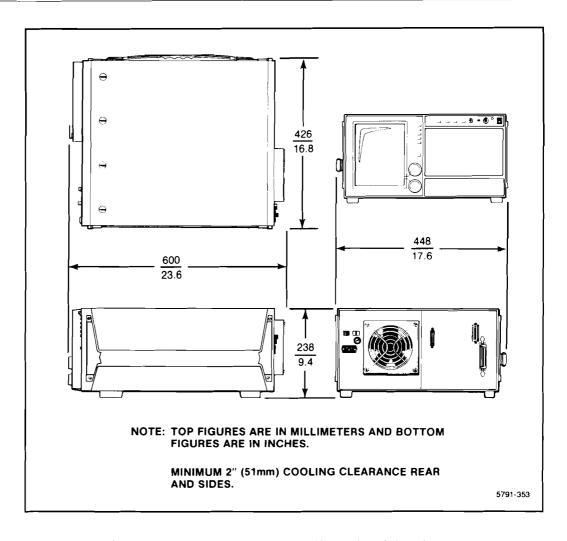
Benchtop 11401/11402 dimensional drawing.
